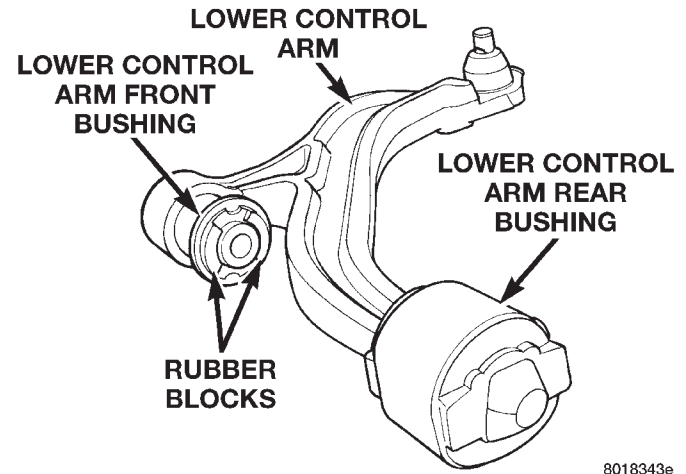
Installation Position Of Lower Control Arm Front Bushing
